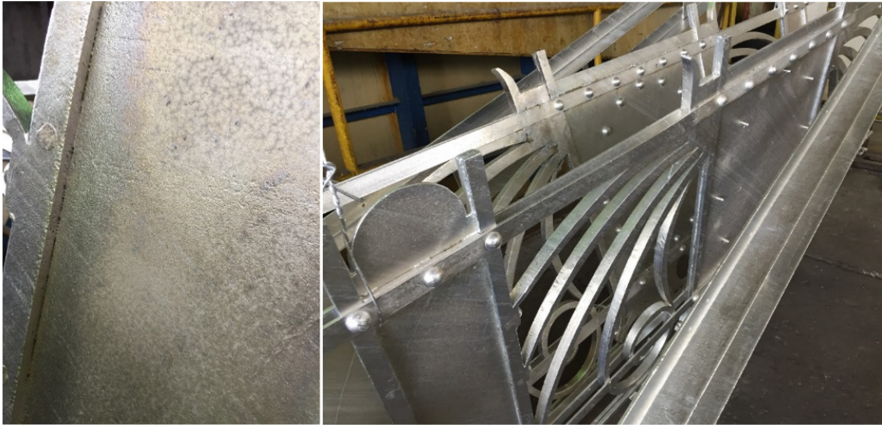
Hot-dip galvanized railing without defects due to burnt paint
